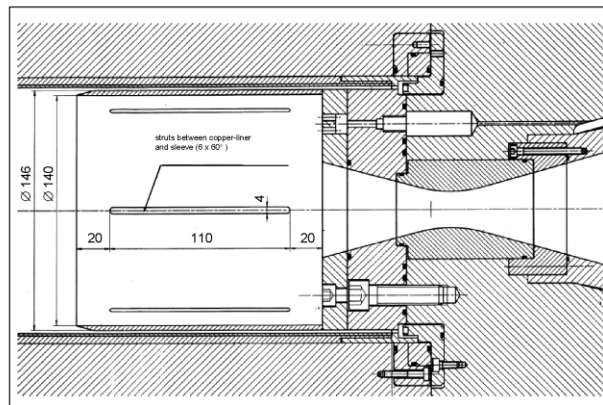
Sleeve mounted at the end of the HEG shock tube; measures in mm
